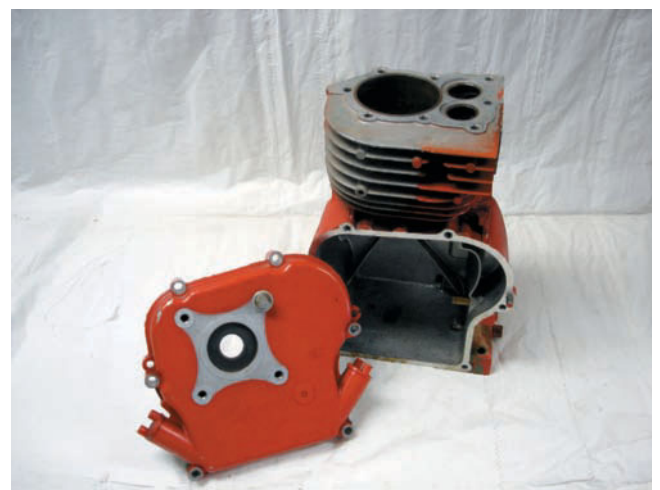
Four-stroke power equipment engines use a cylinder block that holds all engine components together and provides for the main engine mounting points. A cover is used to access the components inside the engine.
